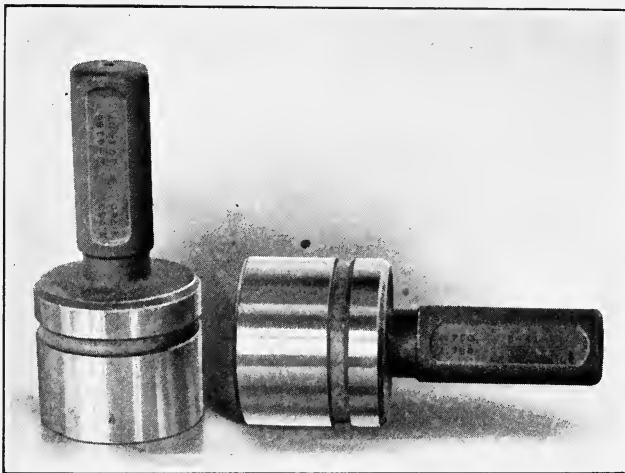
Two-step Plug Gages used for the Inspection of Through Holes
